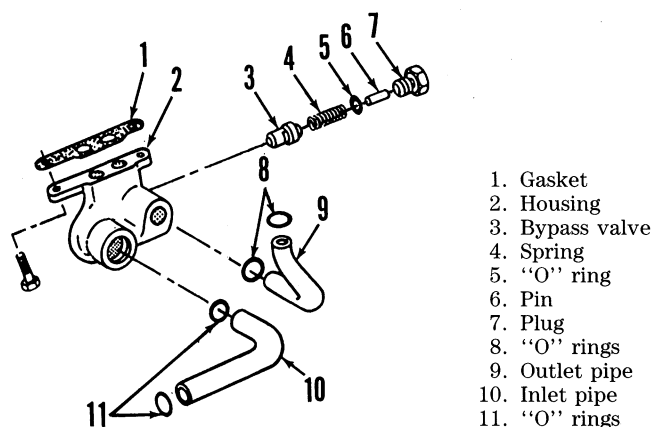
Exploded view of oil cooler bypass valve. The oil pan must be removed for access to the valve.
